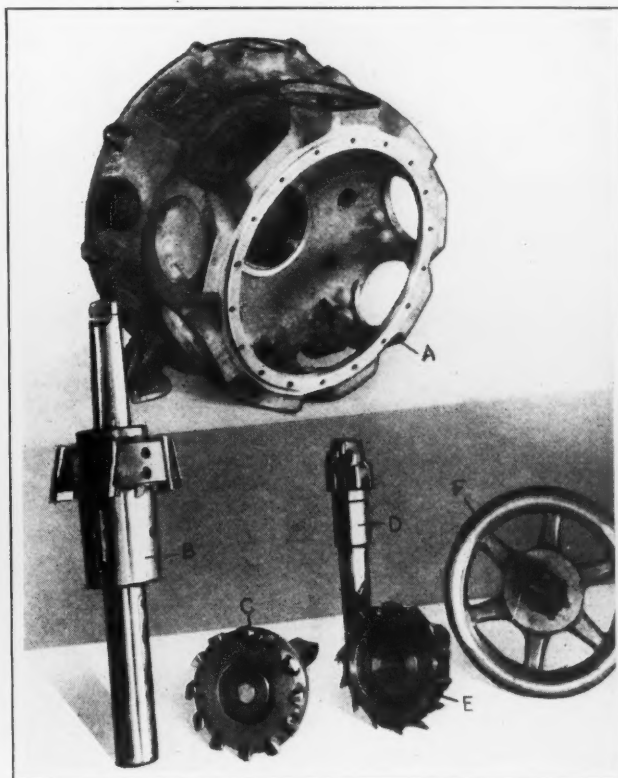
Tools Used in Machining the Crankcase Shown in Fig. 13
